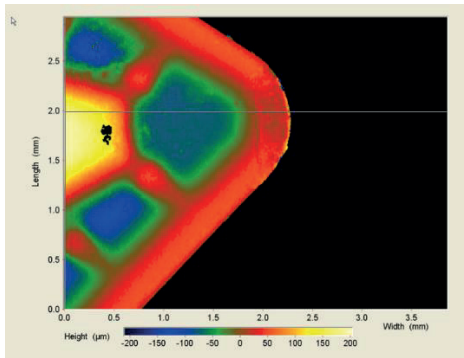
Cutting insert DSSNL 2525M-12 after machining
